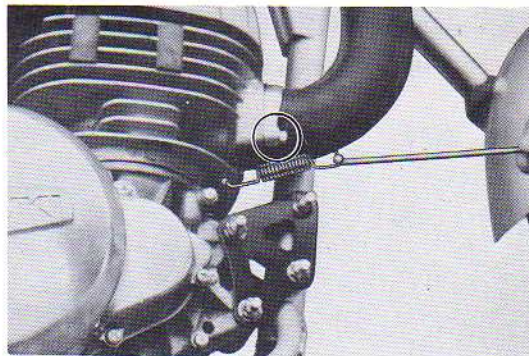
Releasing the exhaust pipe spring and unscrewing muffler fitting bolts
